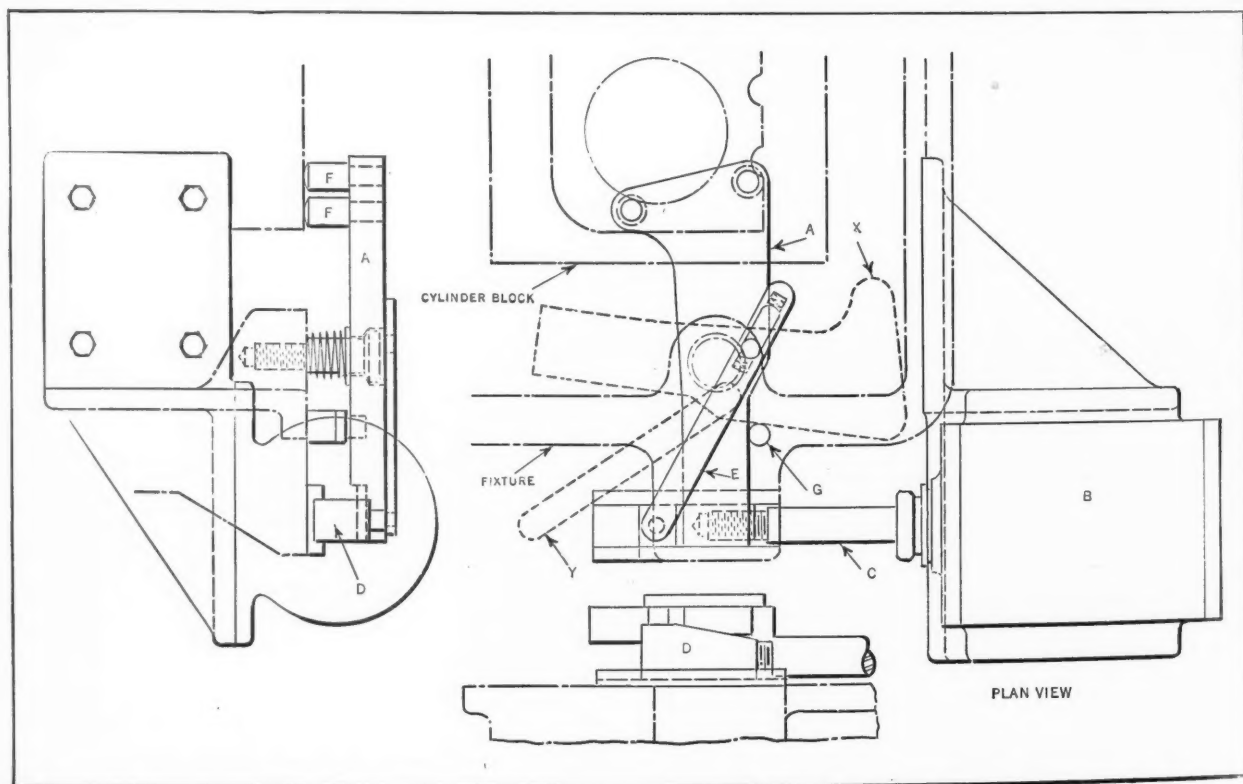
Air-operated Clamp Incorporated in Fixture Built for Holding Combined Cylinder Blocks and Crankcases
